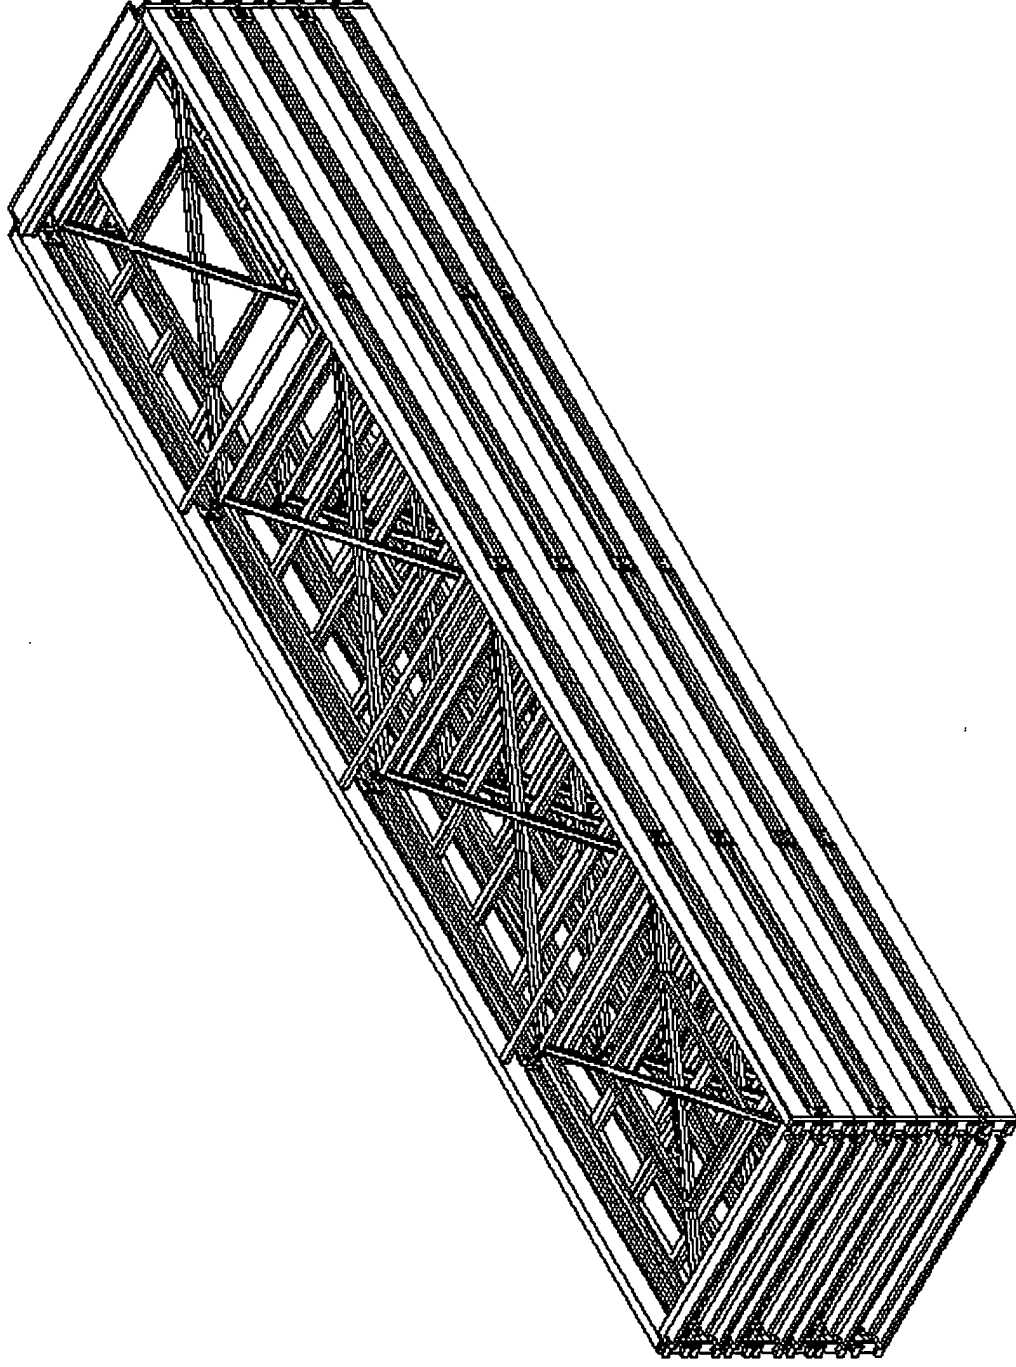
A: Step4 of disassemble and load process: The third "collapsible cargo container frame panel assembly" is stacked on top of previous assembly.
